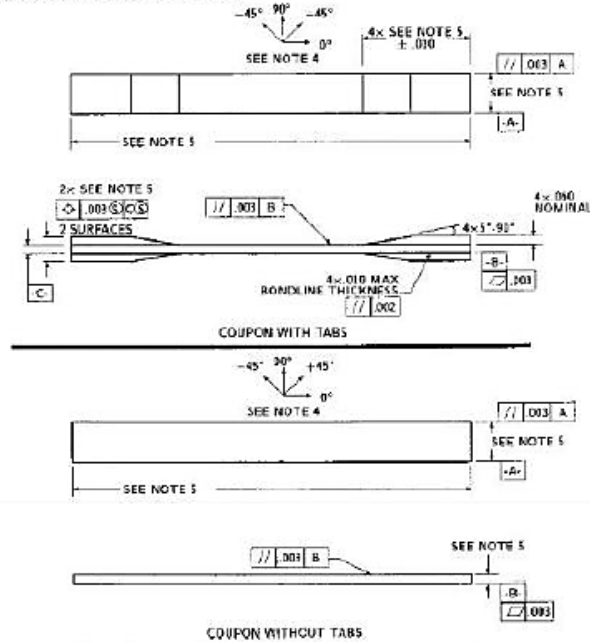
Tension Test Specimen Drawing (inch-pound)
